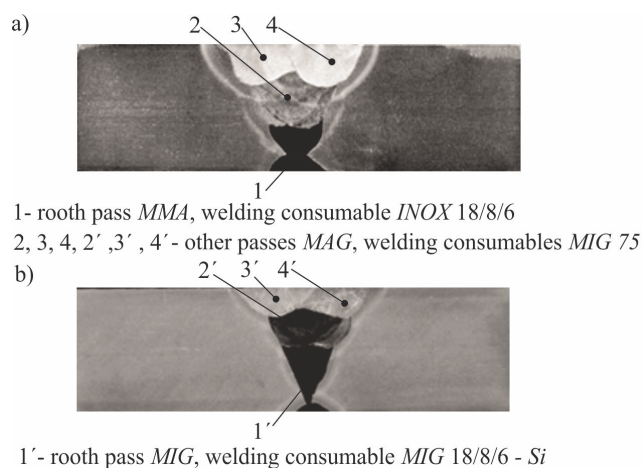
Microphotography of cross-sections of considered welded joints
